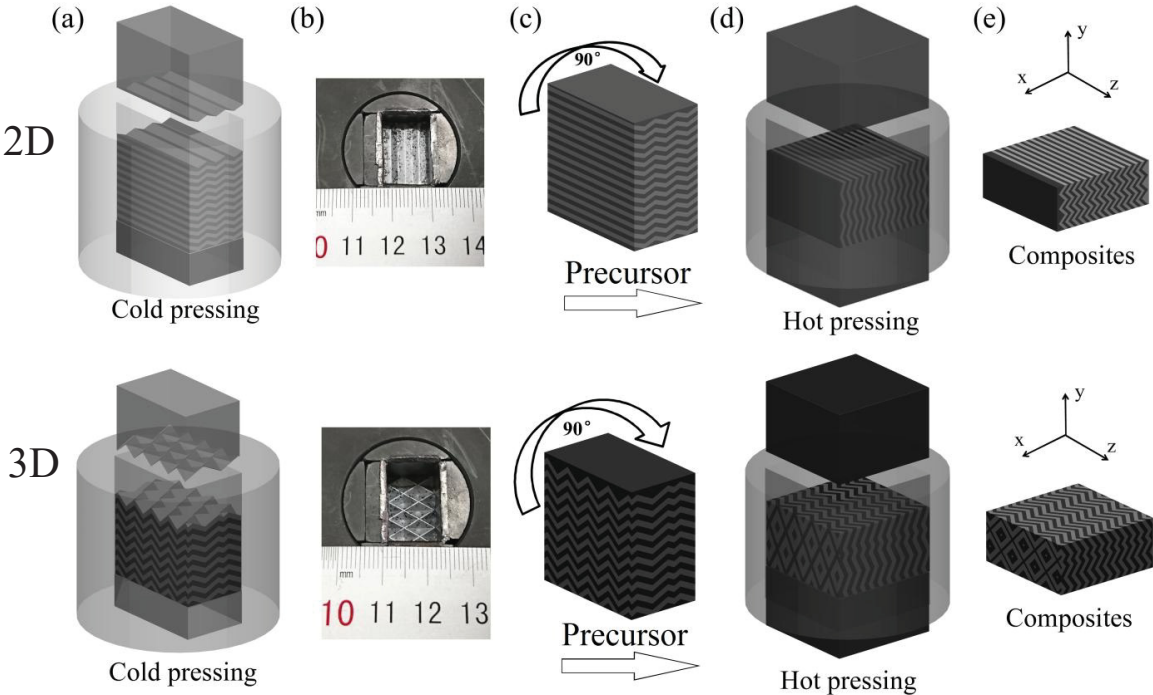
Schematic illustrations of the fabrication processes to acquire the Al/G_f composites with the 2D and 3D arrangements: (a) cold pressing using specifically designed punches, (b) Photographs of the powder layer morphology after cold pressing, (c) the Al/G_f precursor, (d) graphite moulds used for hot pressing, (e) final products.
